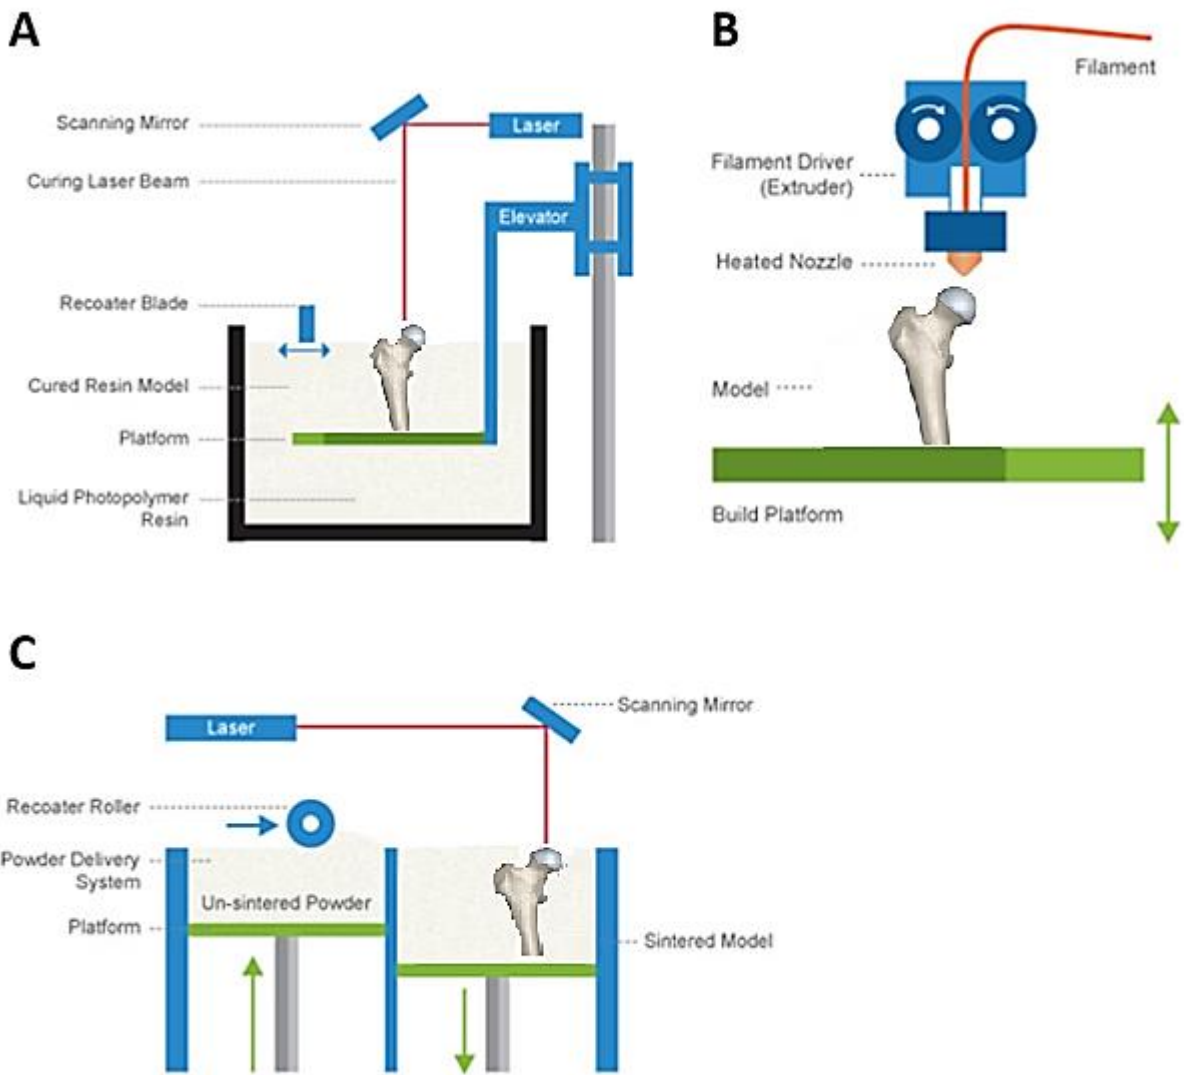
Common 3D Printing Techniques. (A) Stereolithography (B) Fused deposition modelling (C) Selective laser sintering [150].
